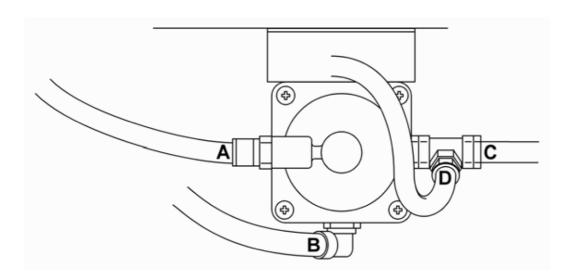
Service brake relay valve (rear) existing air pipe arrangement
